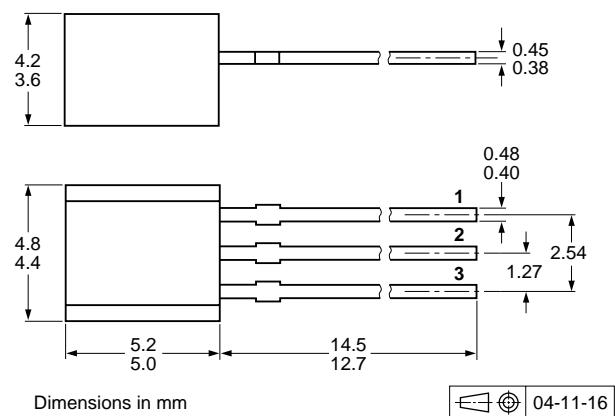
Package outline SOT54 (SC-43A/TO-92)
